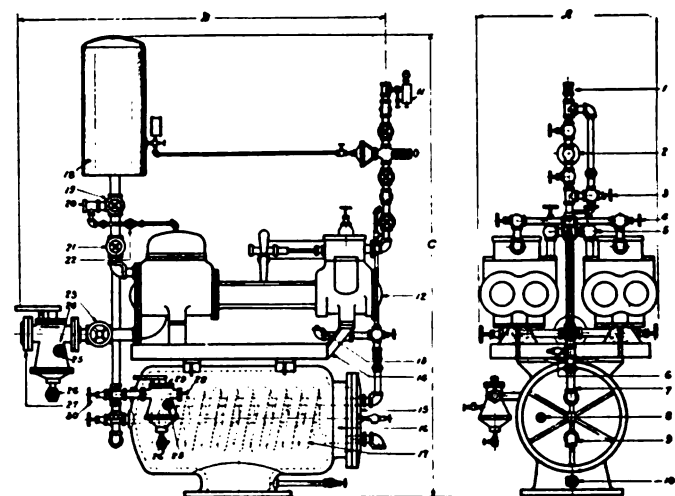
Staples and Pfeiffer oil pump and heater unit.
